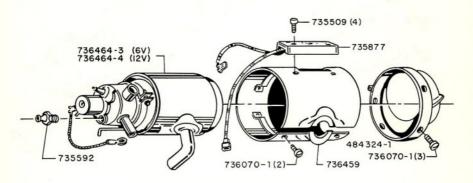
MODEL 8347 HEATER ASSEMBLY 736884 (6V) & 736884-2 (12V)
